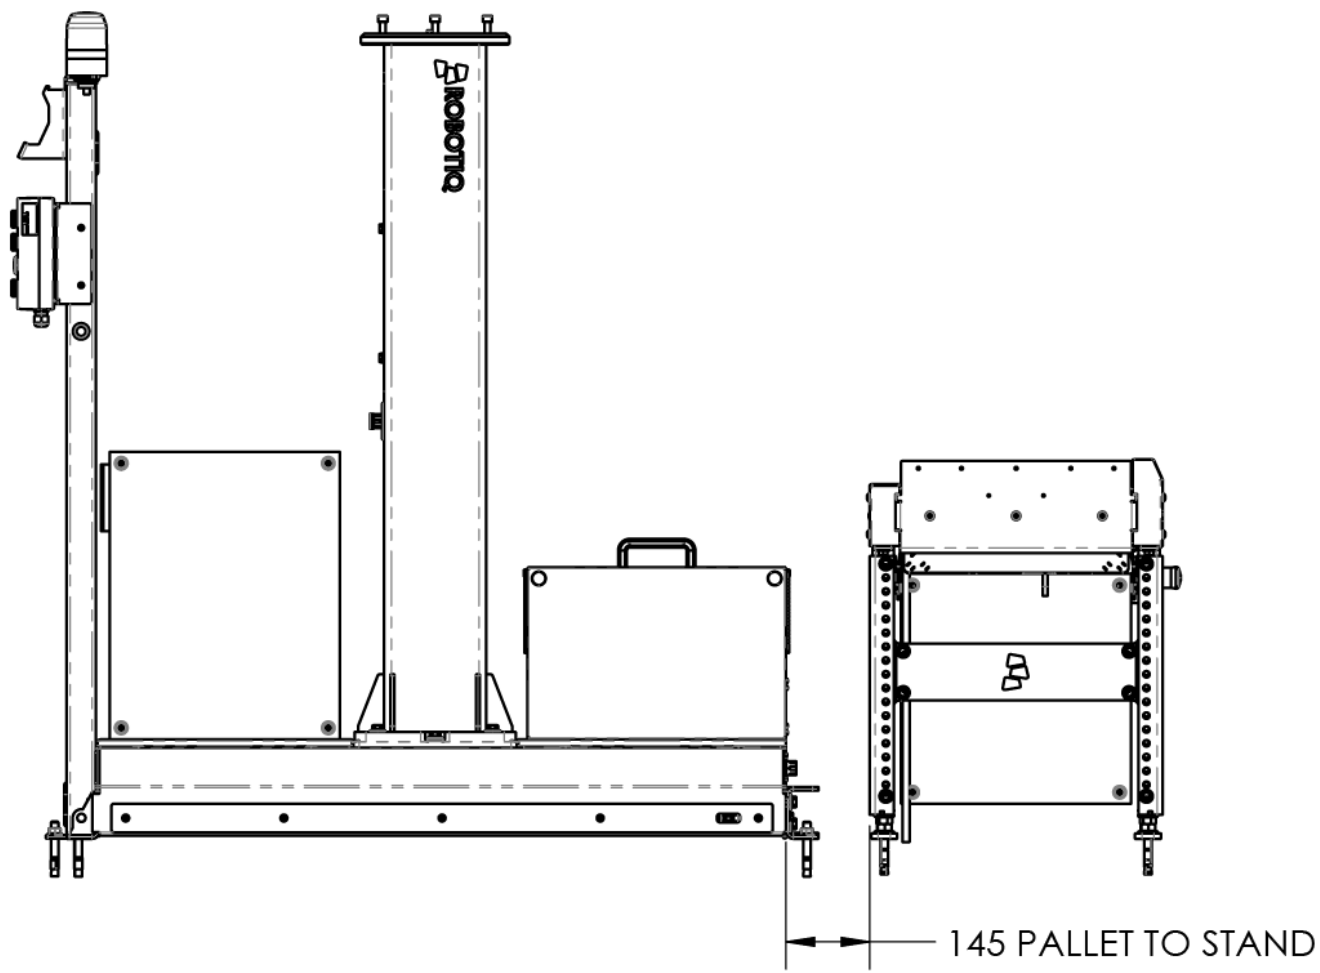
Recommended Default Layout (-90 or 90°)- Lateral View
